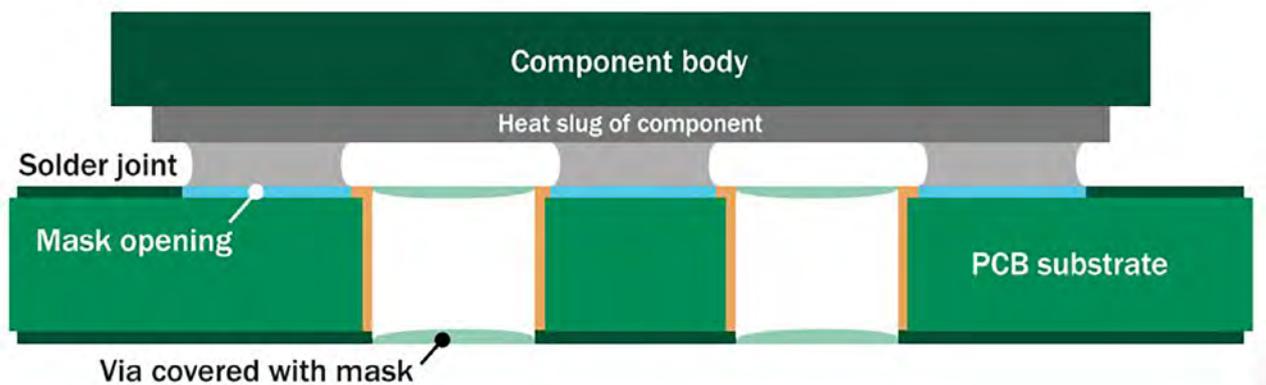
A side view of the board in Figure 1 illustrating placement of joints, mask openings, and vias.
